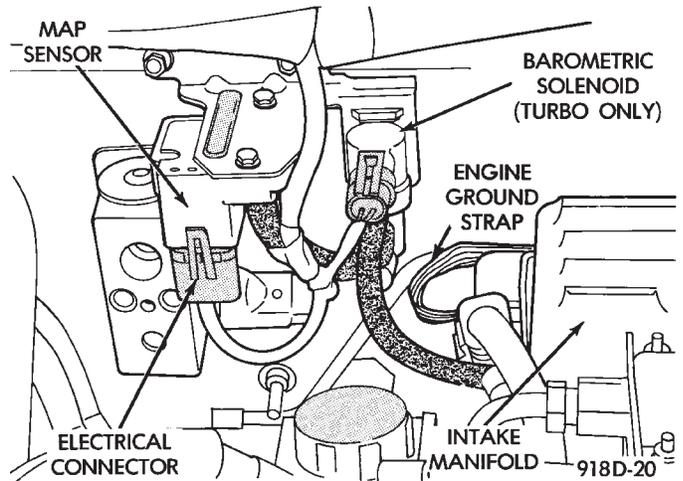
Manifold Absolute Pressure (MAP) Sensor—Turbo I Engines
